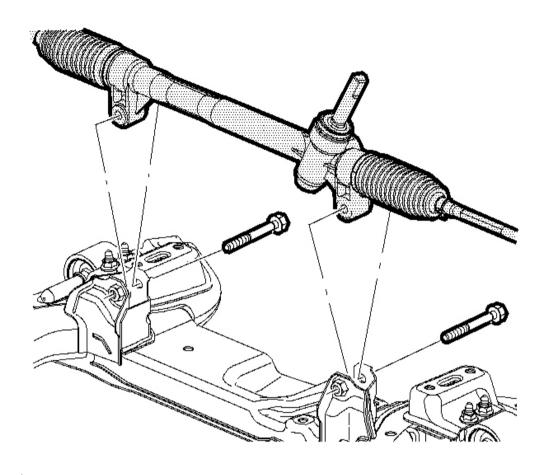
Steering Gear & Mounting Bolts Courtesy of GENERAL MOTORS CORP.
